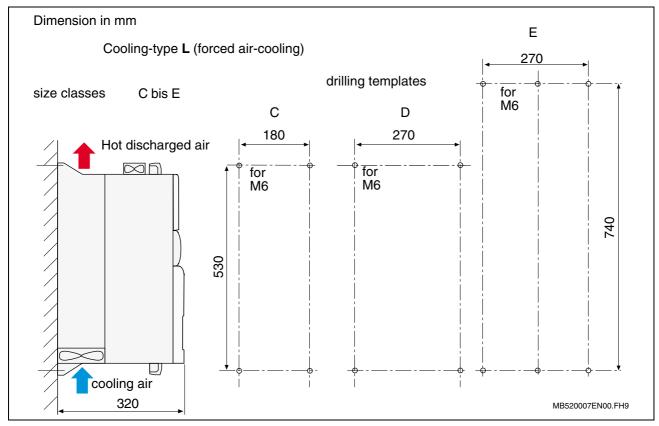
Dimension sheet for cooling type L, size classes C, D, E
